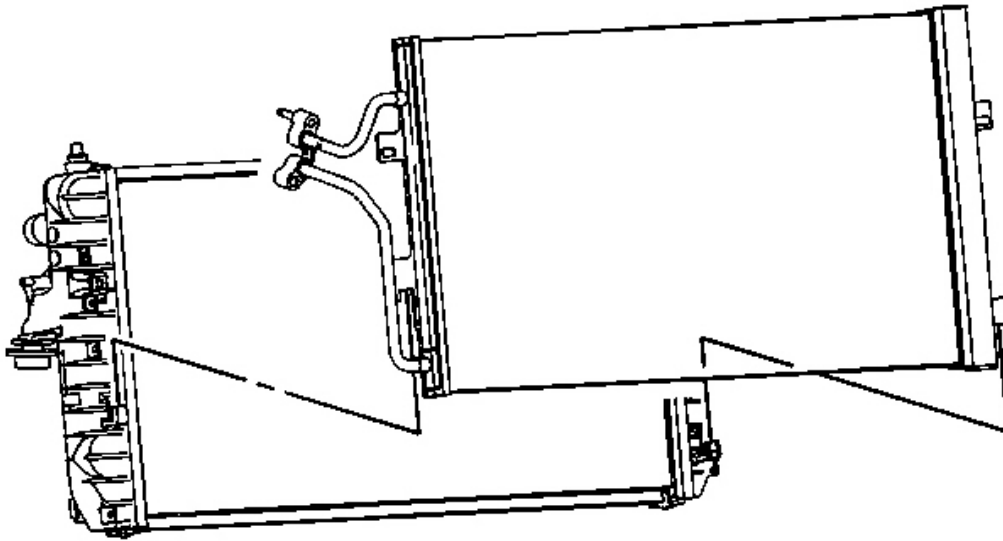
Removing/Installing Condenser To/From Radiator Retainer
